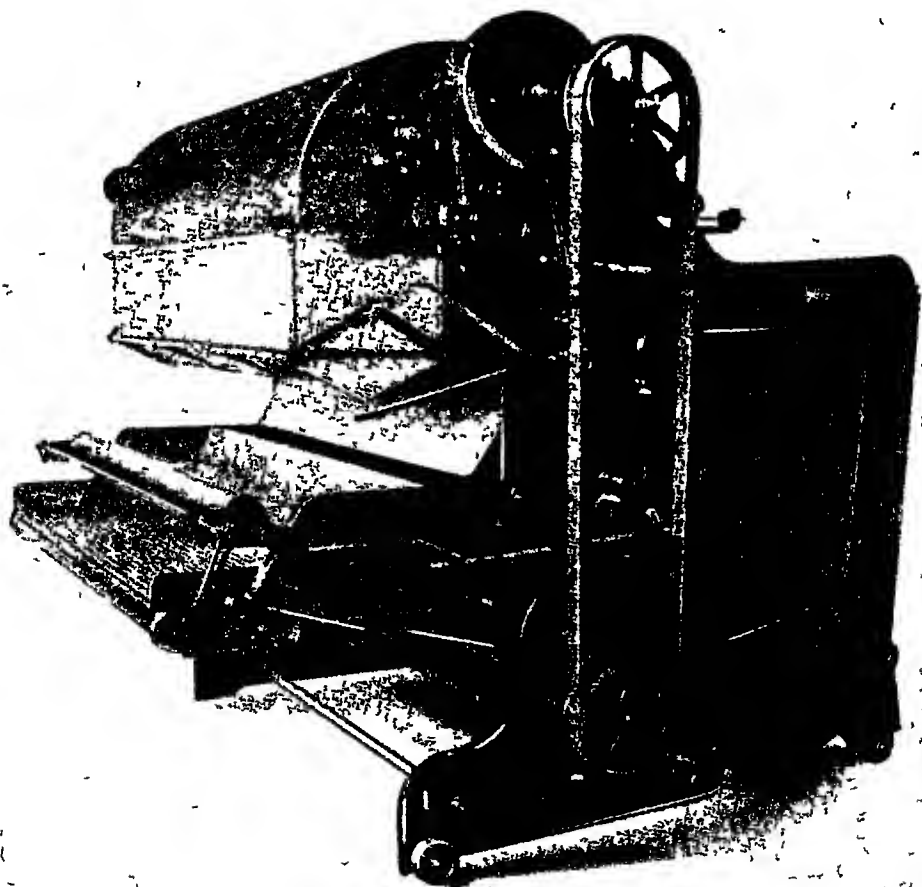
Modern automatic-weigh feeder. (Courtesy *Whitn Machine Works*)
